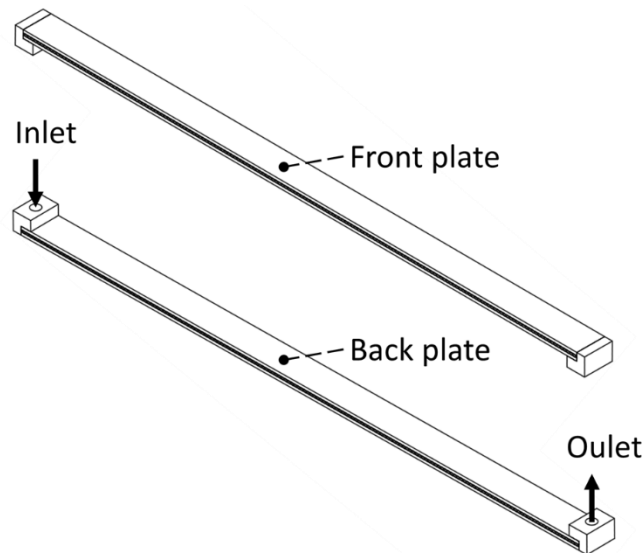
Sketch of the bar-and-plate flat receiver including inlet and outlet fluid directions.
